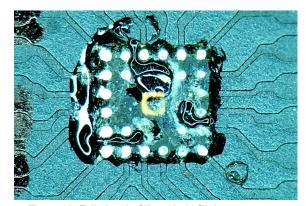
Failed underfilling. Underfill does not cover underneath full chip area (view of PCB with chip removed)
